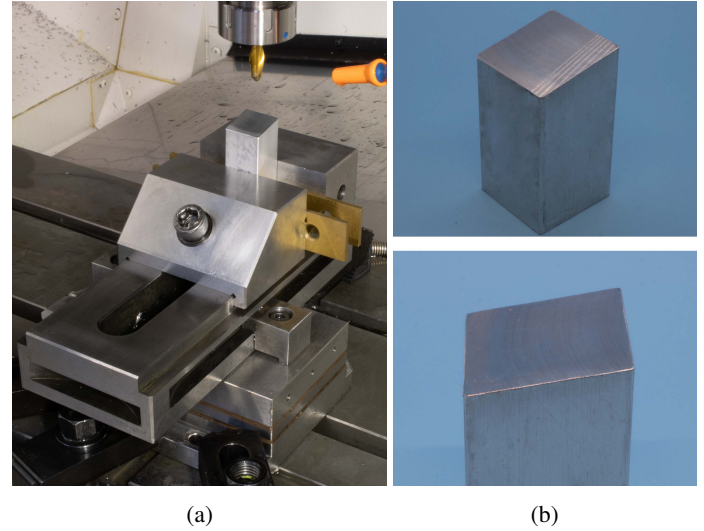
(A) EXPERIMENTAL SETUP AND (B) WORKPIECE WITH ANGLED SURFACE
